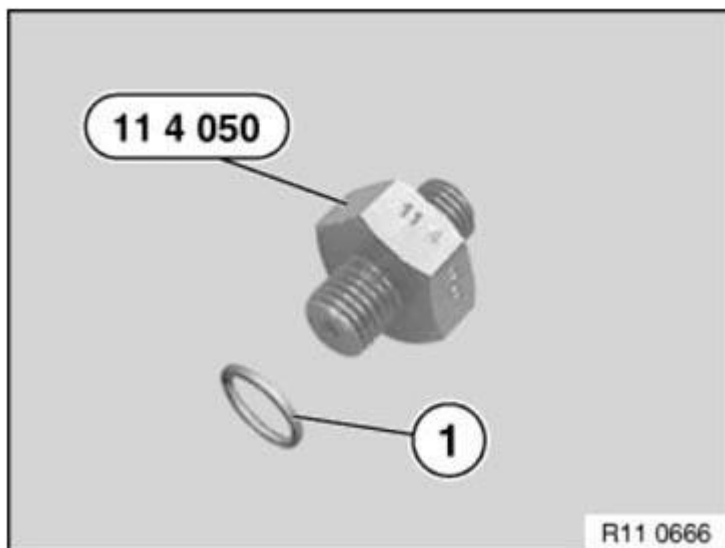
Identifying Special Tool (11 4 050) And Sealing Ring
